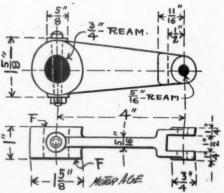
Vehicle Brake Rocker Arm. 1—Cast Iron or Semi-Steel.
